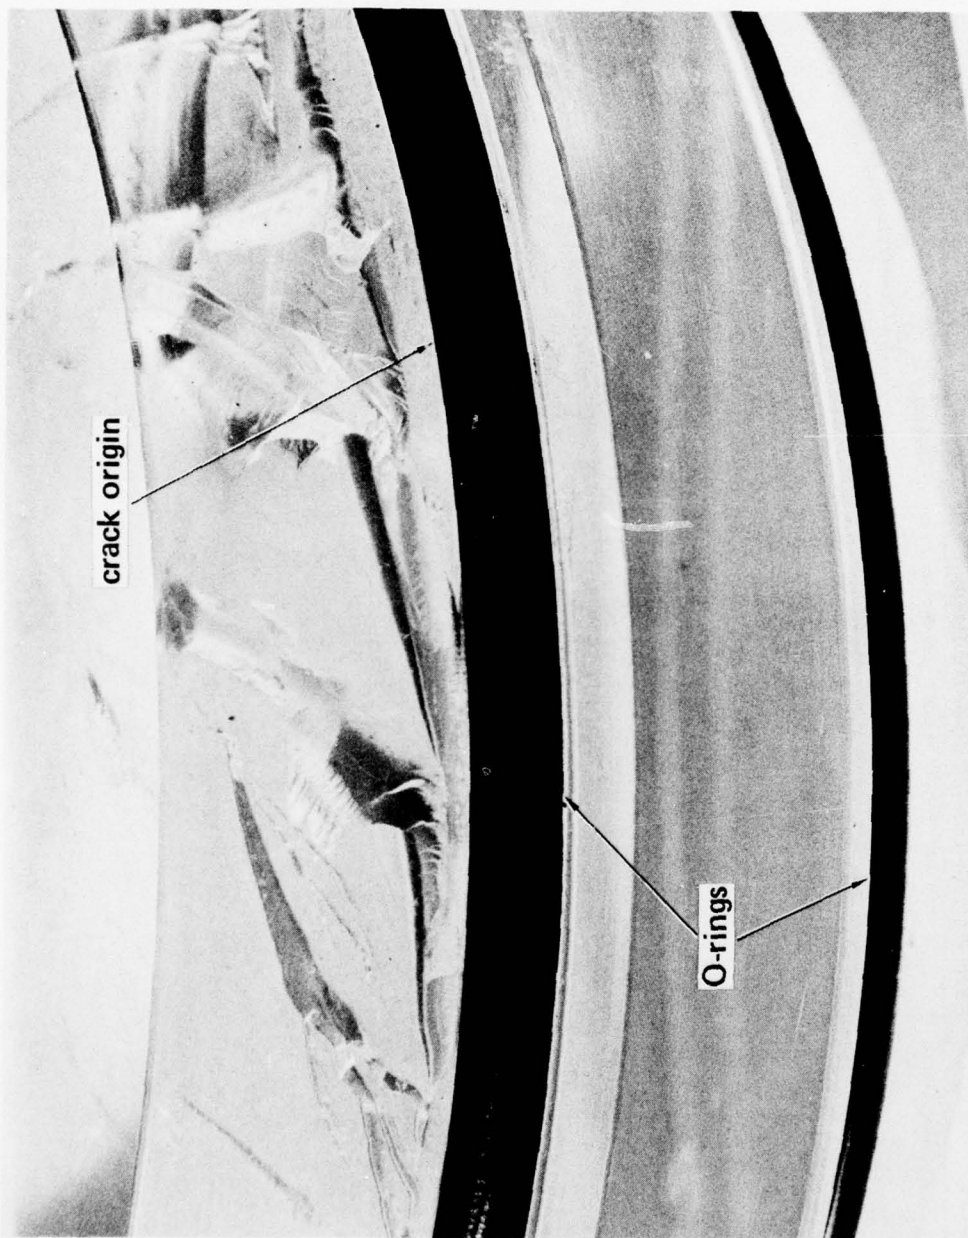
Plane disc with twin-beveled bearing surfaces showing fractures initiated by the O-ring grooves in the bearing surfaces.
